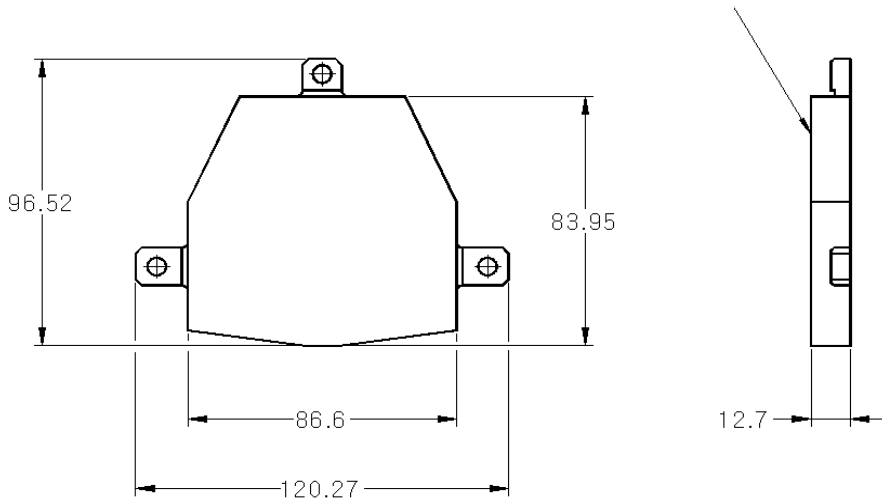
Schematic Drawing of Al Flat Mirror
